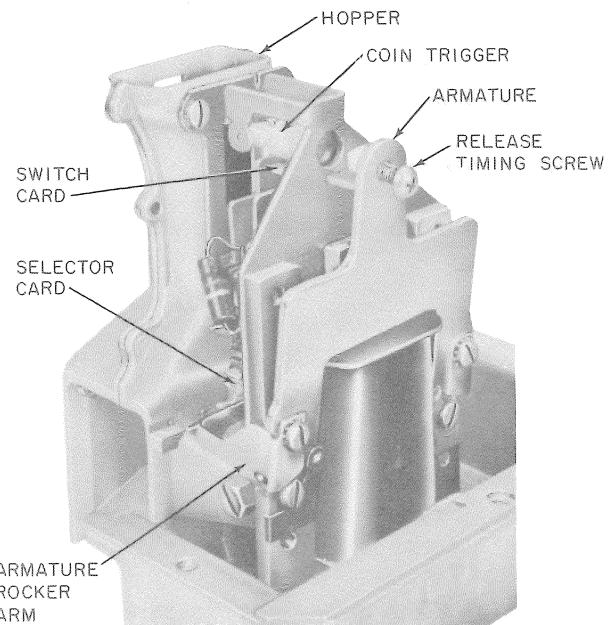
P-10E683 Mechanism Unit With P-13E961 Coin Relay
